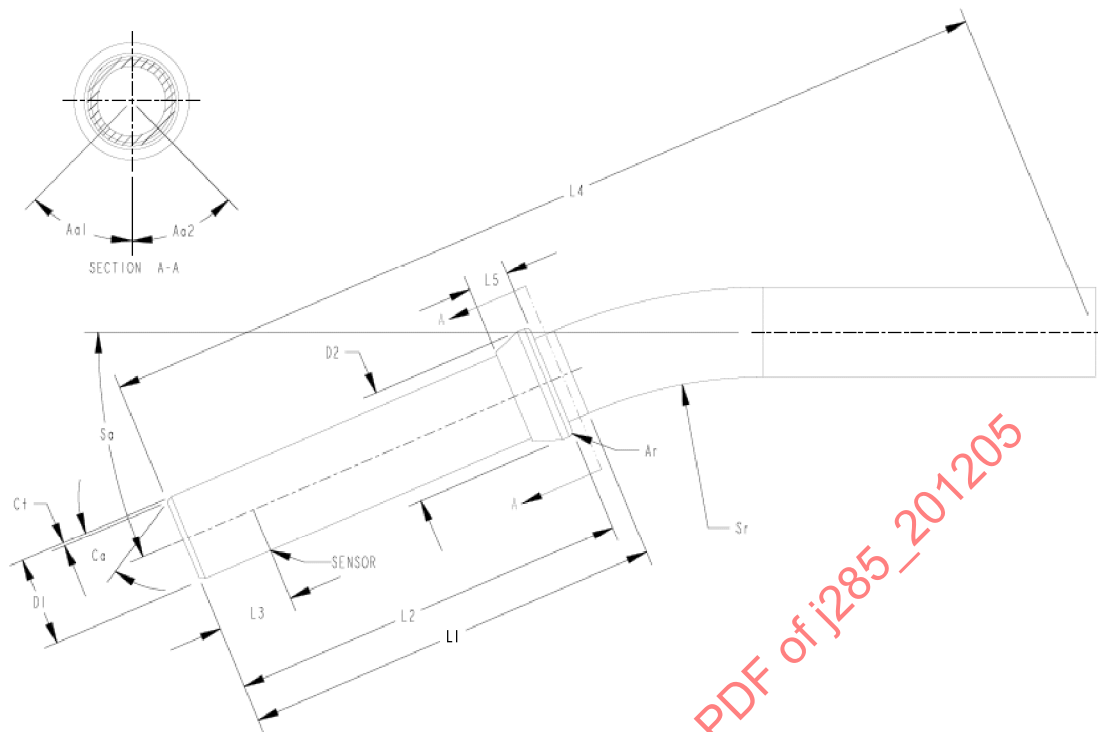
NOZZLE SPOUT DIMENSIONS
